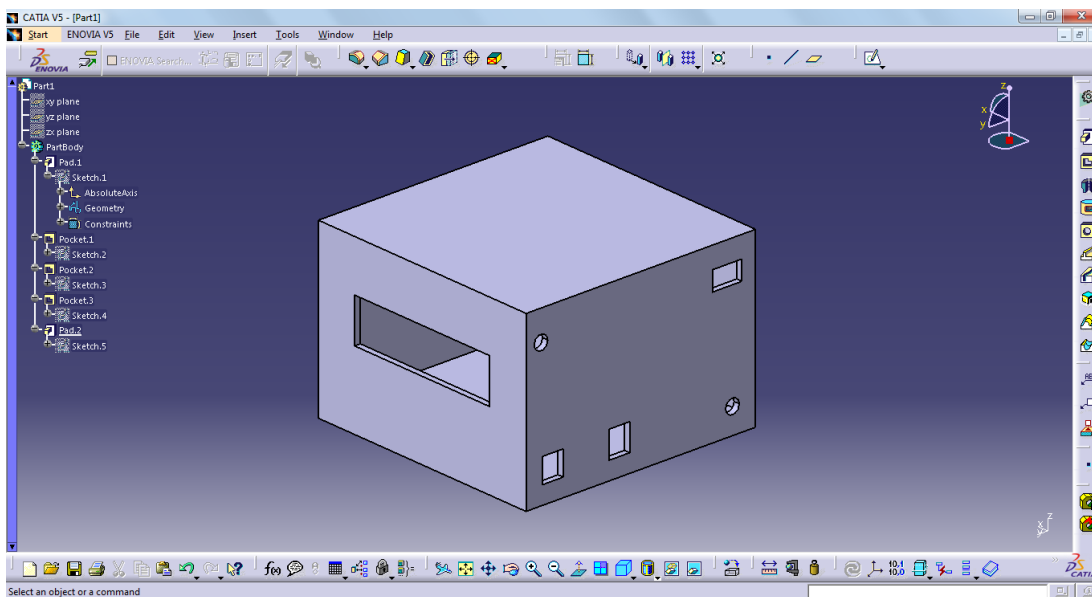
3D view of the device casing to be place on top of the Milling Machine.
